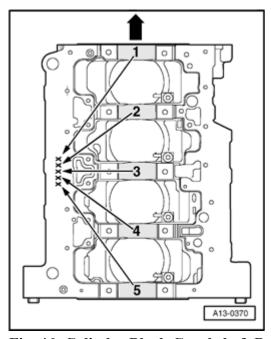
Cylinder Block Crankshaft Bearing Shells Identification Courtesy of VOLKSWAGEN UNITED STATES, INC.
